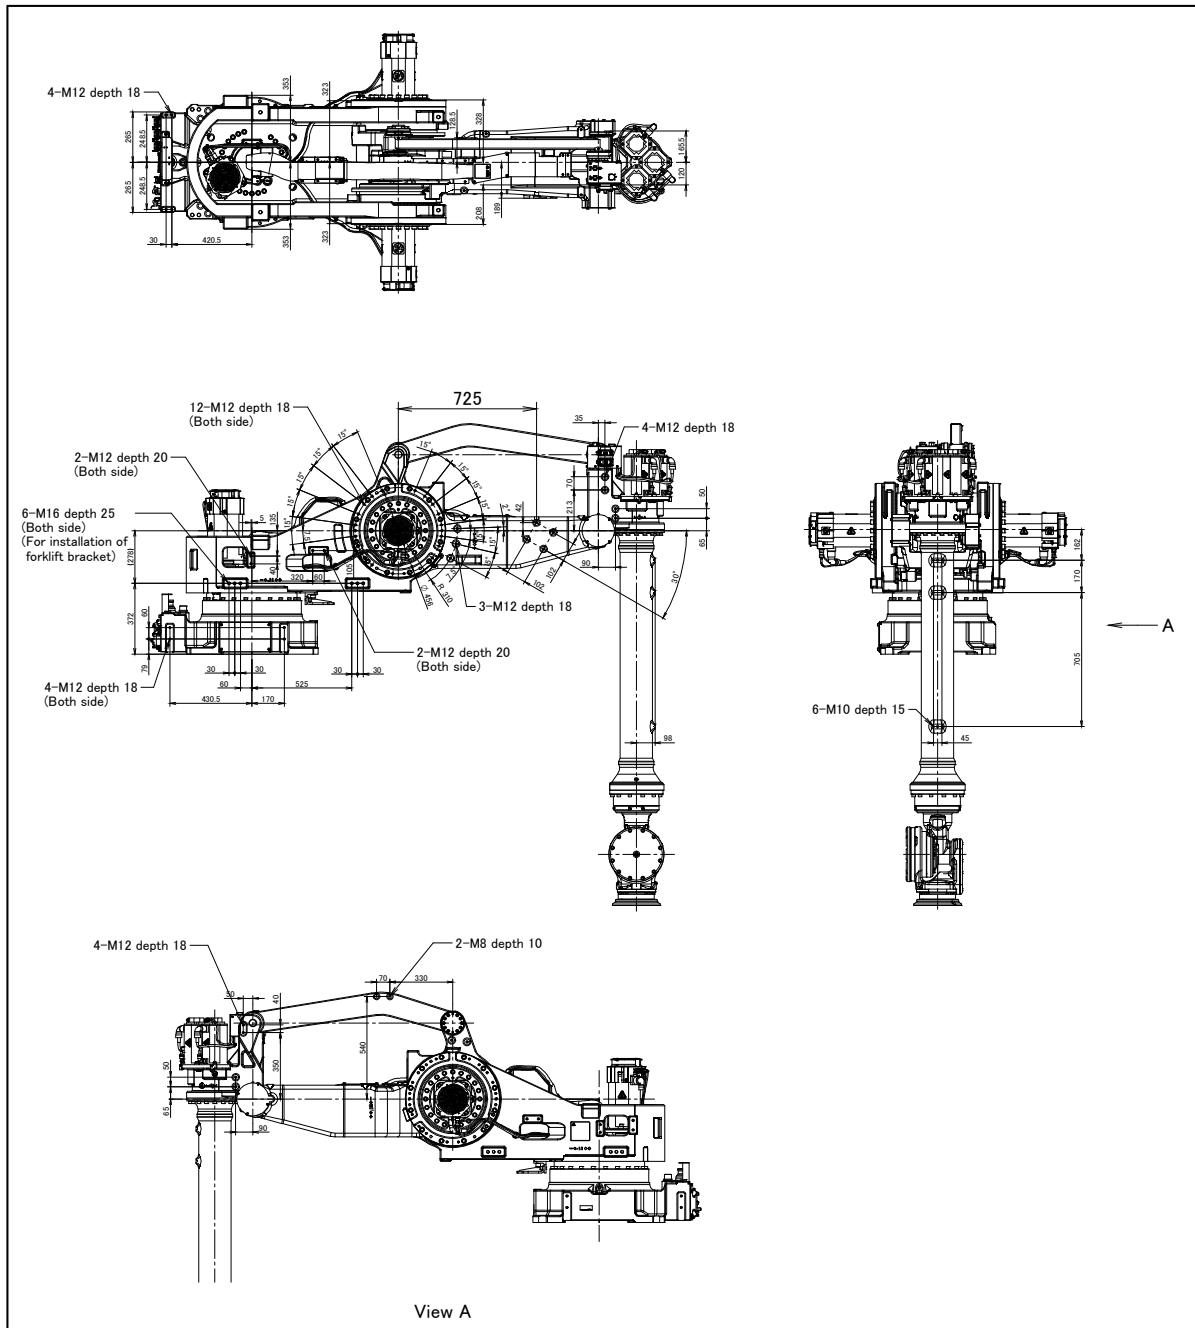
(b) Equipment mounting faces (M-900iA/150P)
